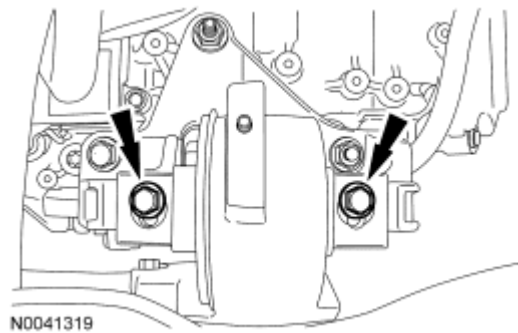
Identifying Heated Oxygen Sensor (HO2S) Bracket & Stud Bolt
